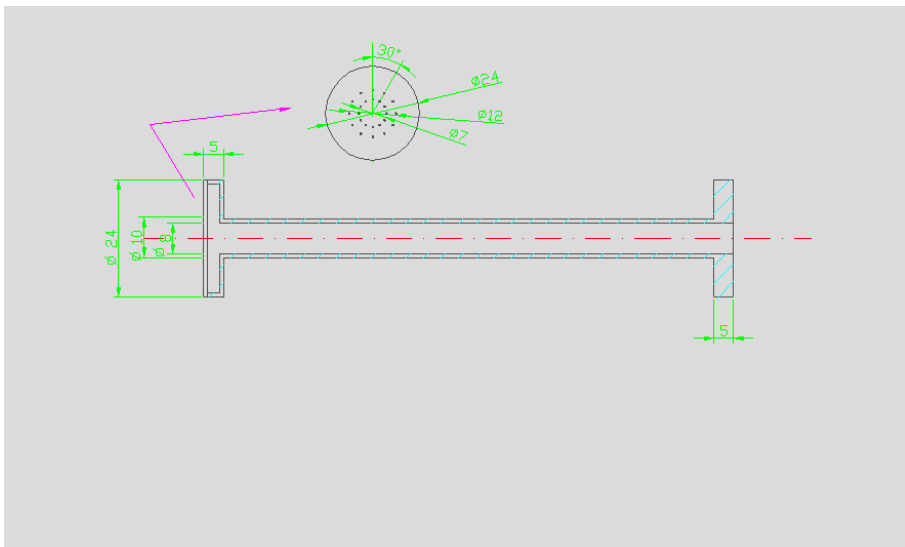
Evaporator outline: a stainless steel tube with at one limit a “shower”; vapour sample flows trough the holes, shown in the inset into the vacuum, the other end is weld on a flange connected to a leak valve, a linear travel allows to move the evaporator close to the surface.
